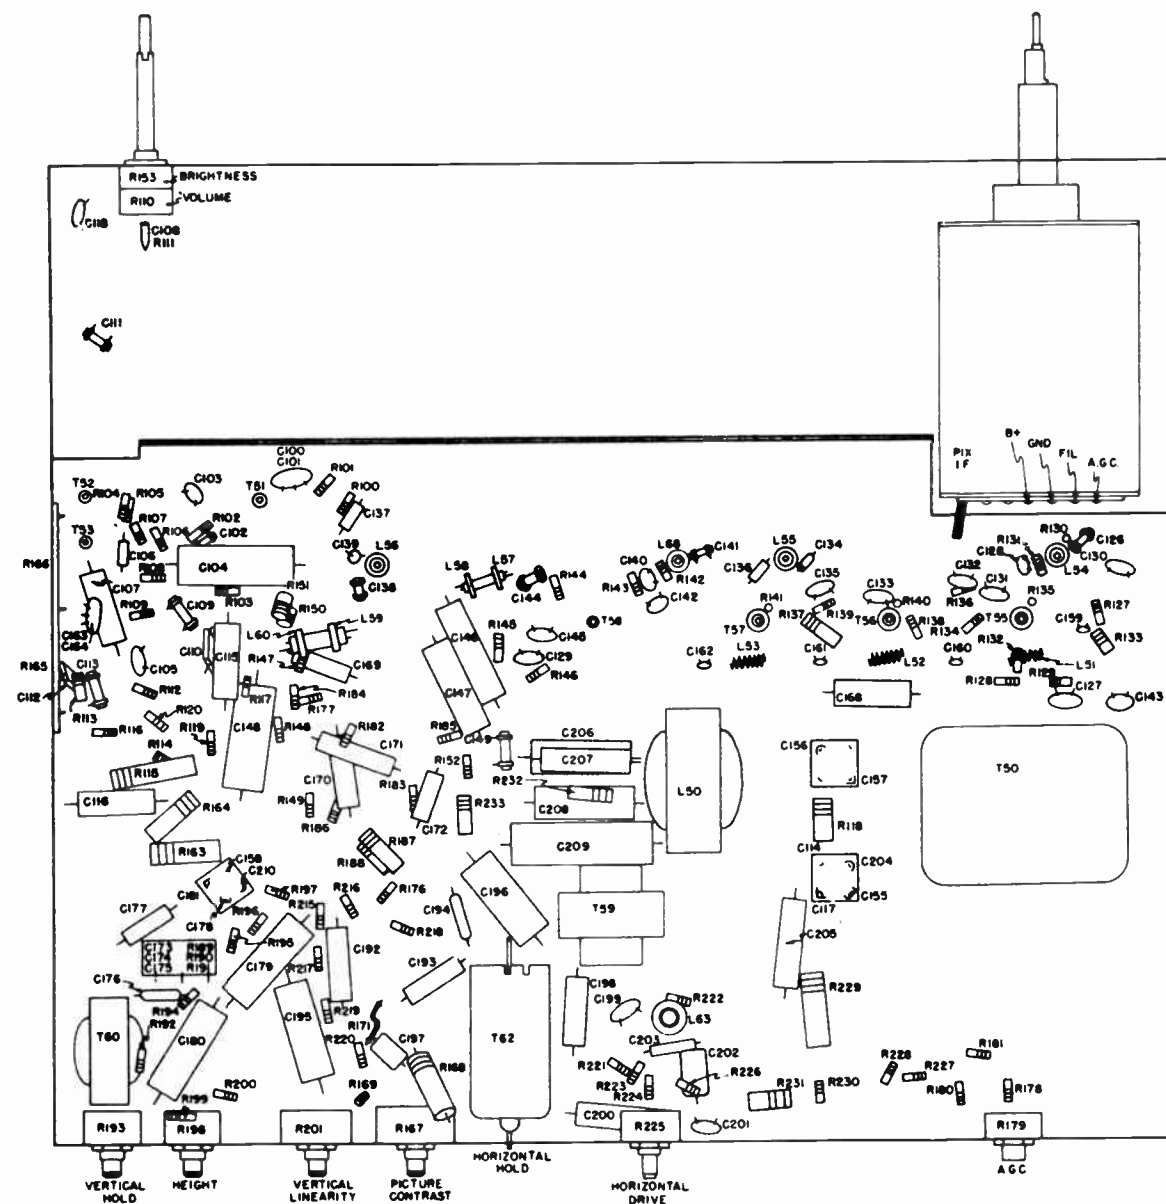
CHASSIS BOTTOM LAYOUT
